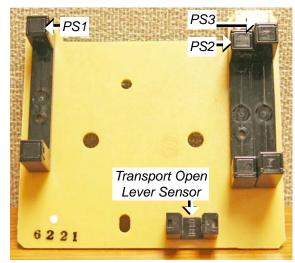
Sensor Board (3C00, 4C00, 5C00)
